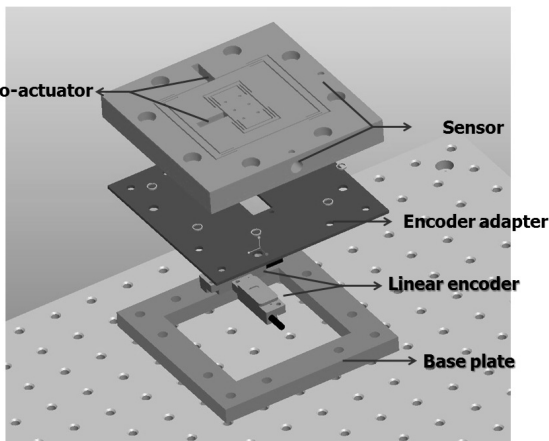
Normal size stage (120×120 mm) and test-bench fixture including linear encoder sensors
